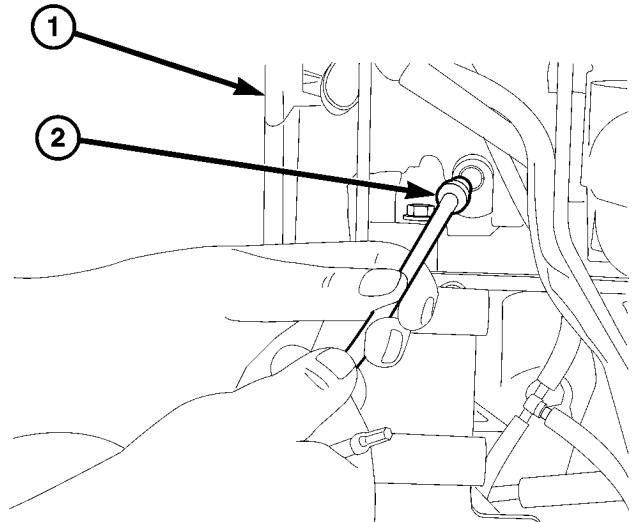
EXHAUST CAMSHAFT ALIGNMENT PIN
